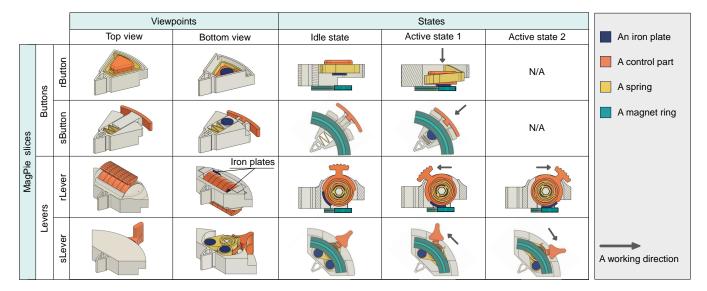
Tangible MagPie slices which incorporate iron plates, control parts (e.g., handles), and springs.
